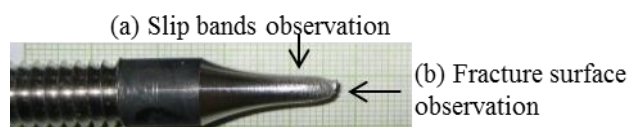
Fatigue fracture indicates, (a) slip bands and (b) fracture surface side.
